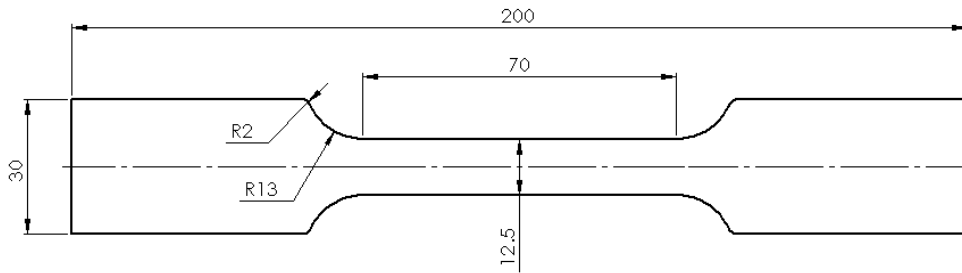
Schematic diagram showing the dimensions of a flat, rectangular dog-bone specimen used for uniaxial tension tests.
